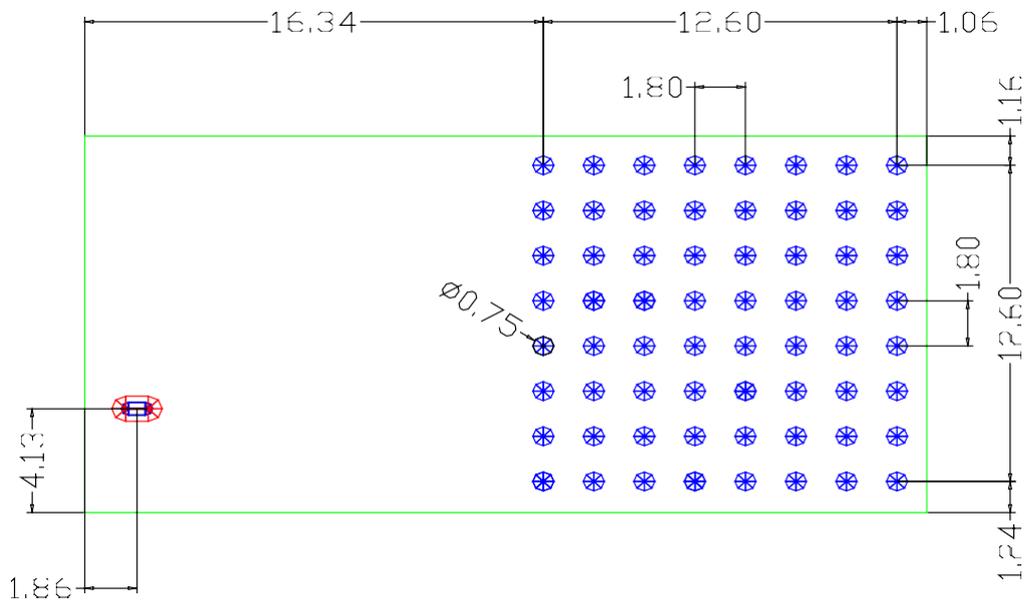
GTI-MW300L / MW320L module mechanical dimension-Bottom view (Unit: mm)
